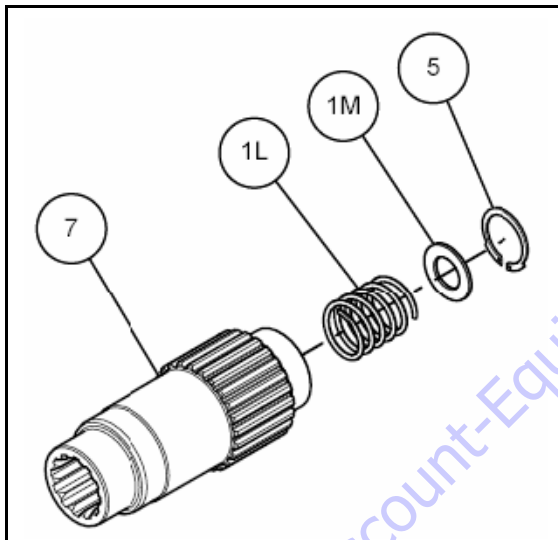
Spindle-Brake Subassembly - Figure 2
